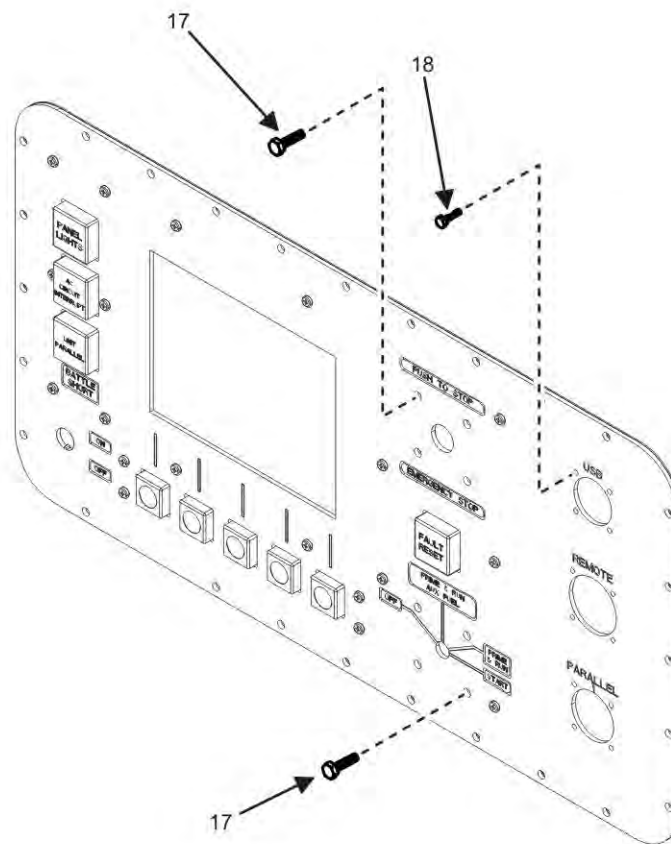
DCS Control Panel Assembly (Sheet 3 of 6).
